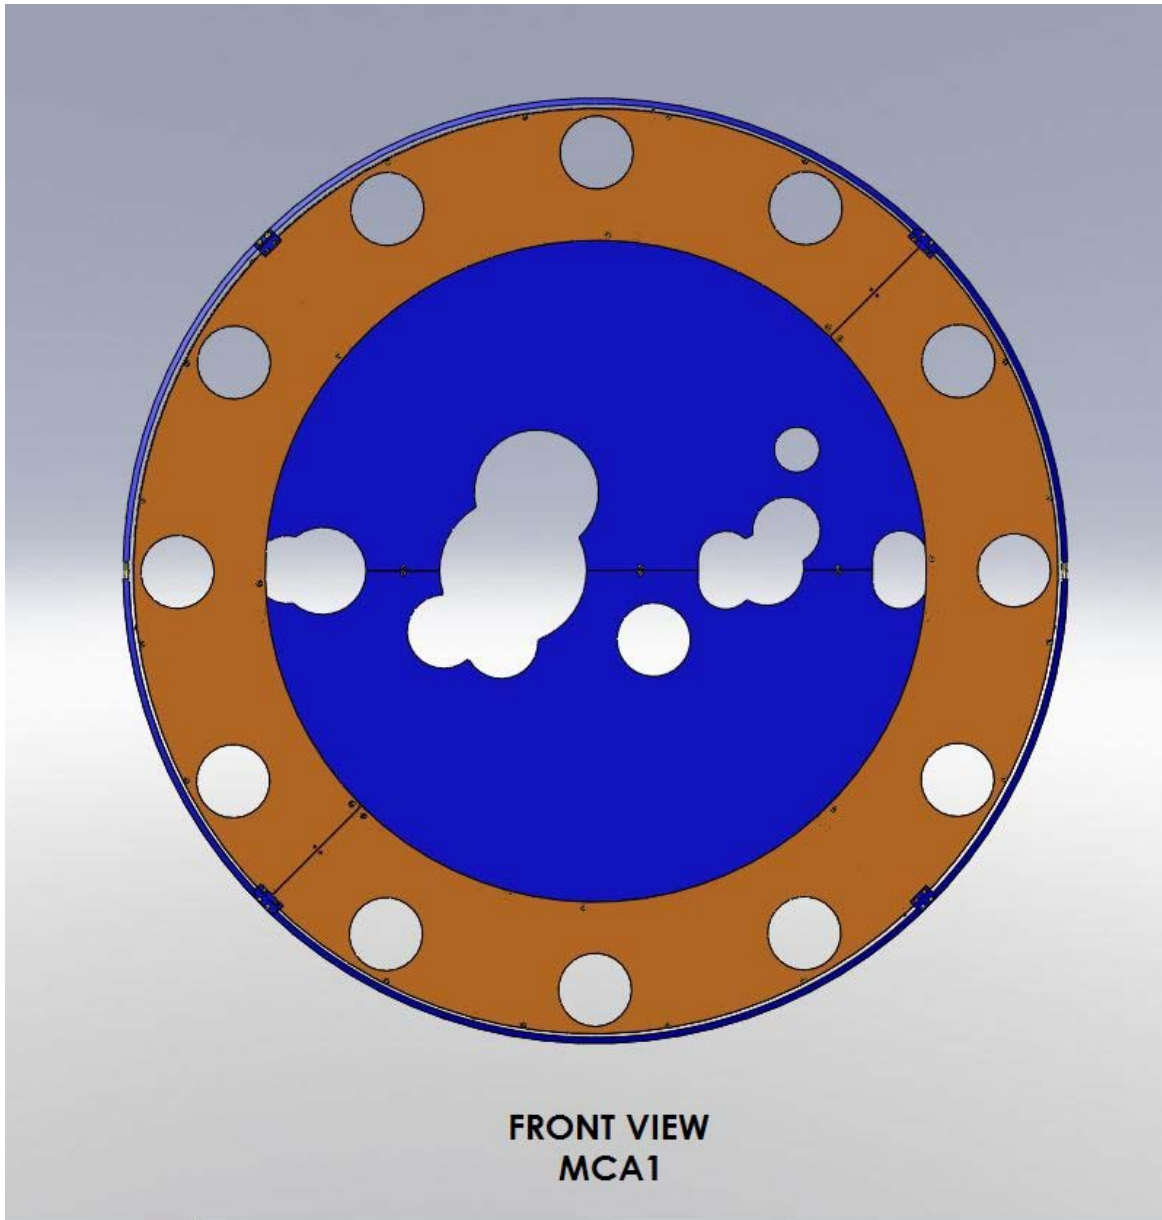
Front View of MCA1 Mode Cleaner Tube Baffle
